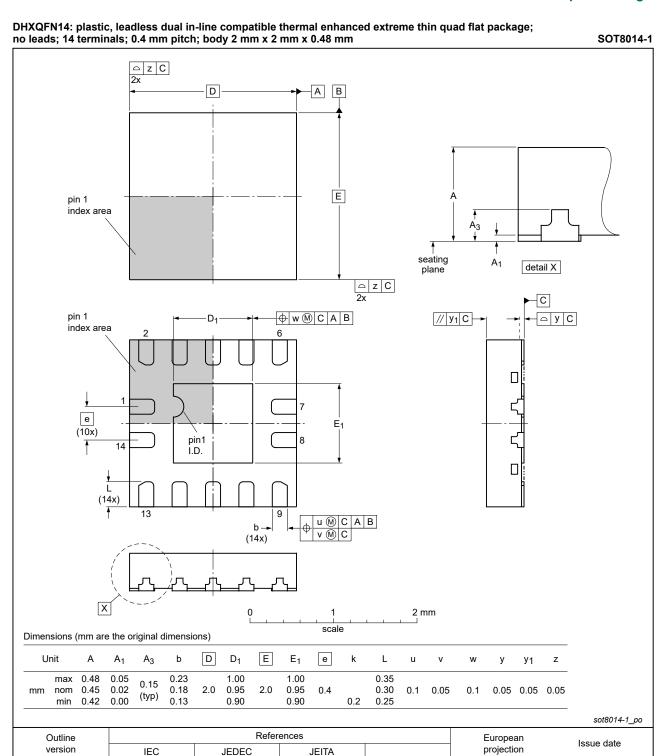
Package outline SOT8014-1 (DHXQFN14)
